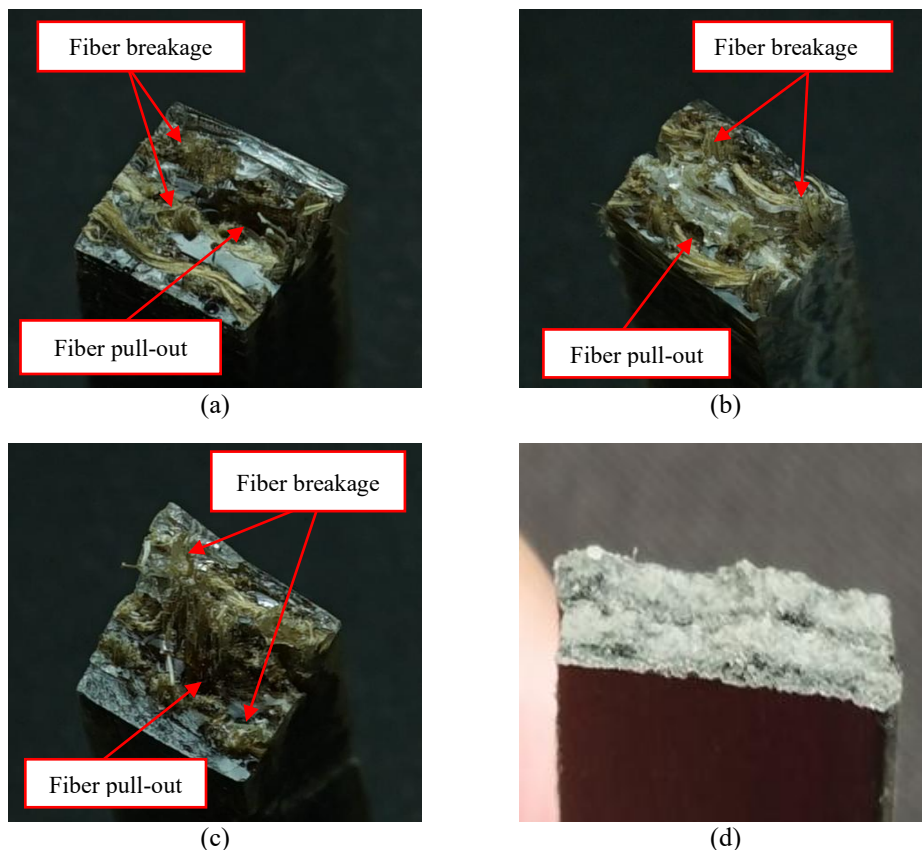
Fracture of impact test specimen (a) plain; (b) twill; (c) basket; (d) car bumper
